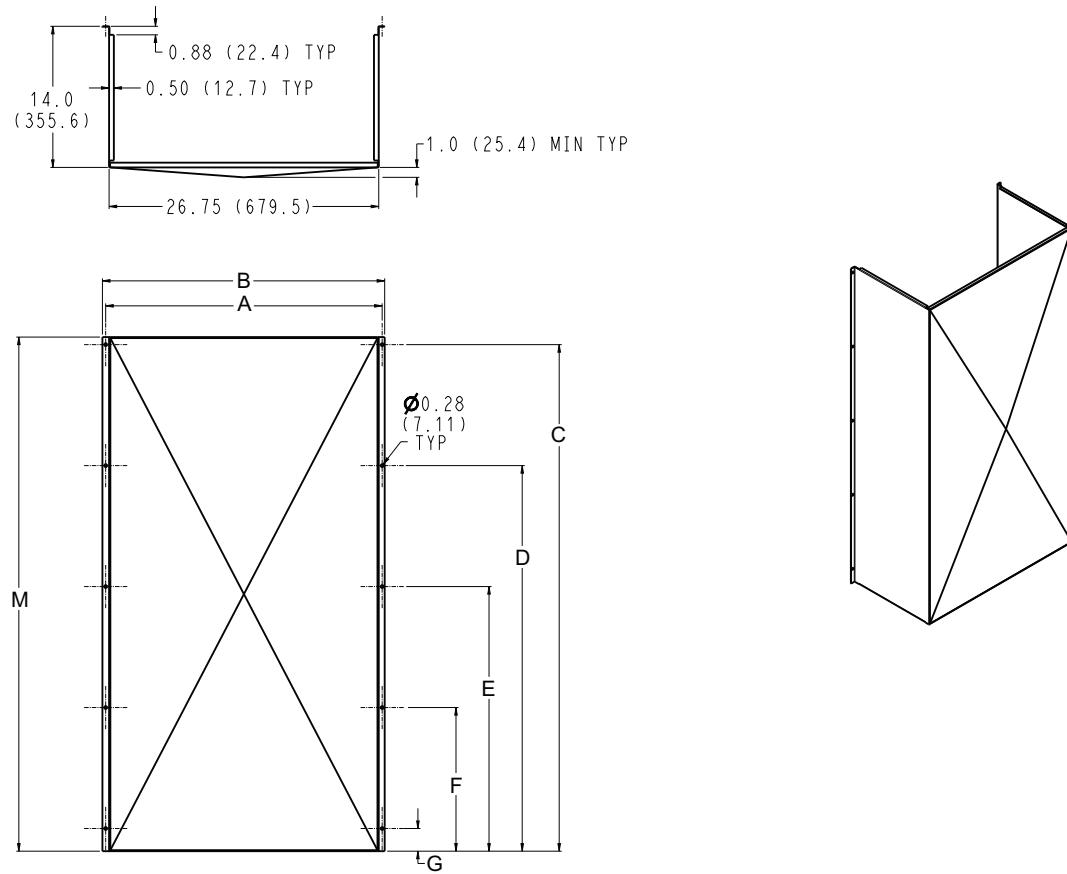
Cabinet C — Side Baffle G (Front/Top View)
